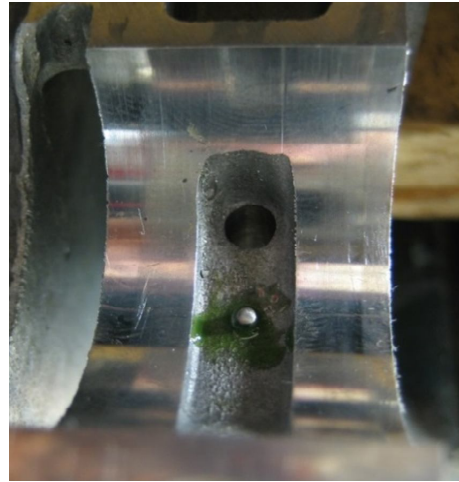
Thermocouple installed in oil feed groove to camshaft bearing
